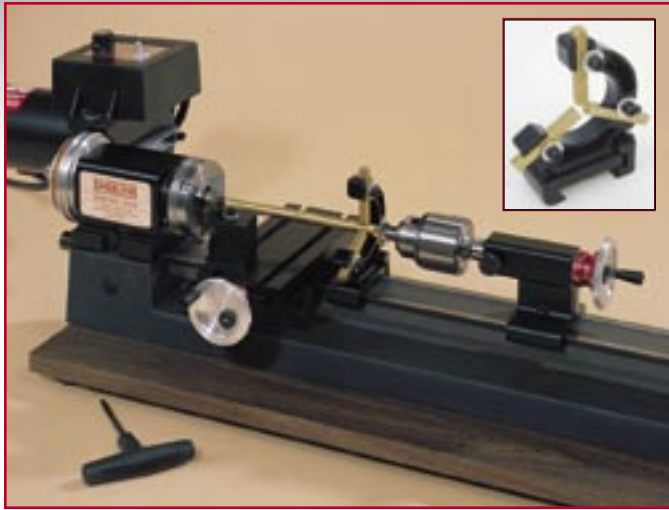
To drill a hole in the end of a long shaft, the lathe is set up with a center drill in the drill chuck, which is mounted in the tailstock. The steady rest keeps the shaft from wobbling and assures that the hole will be concentric with the outside diameter of the stock.
